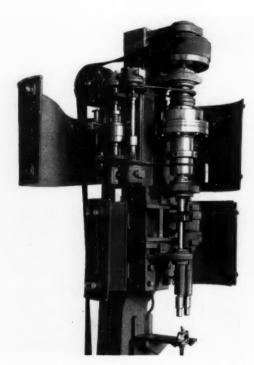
Nut driving machine, guards open to show 10-inch magnetic clutch controlling drive
